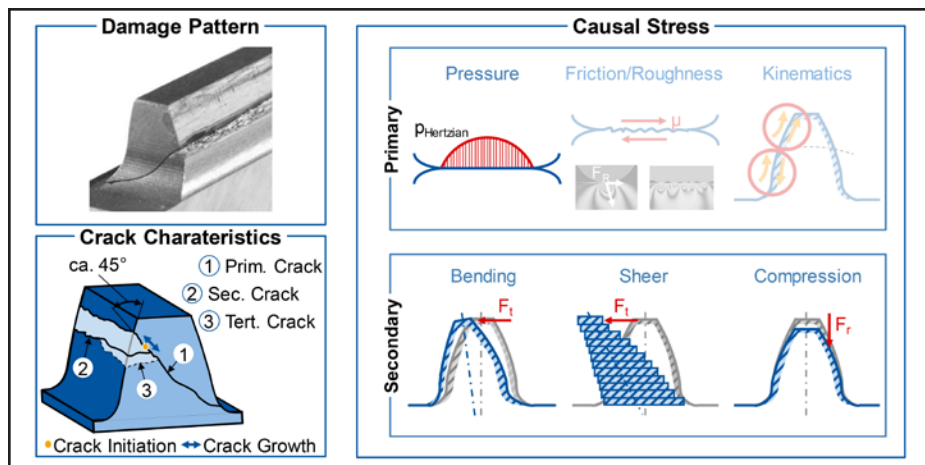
Characteristics of tooth flank fracture (Ref. 22).
